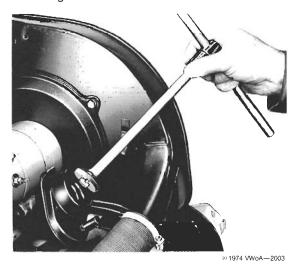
Special tool being inserted into oil filler to remove gland nut.
